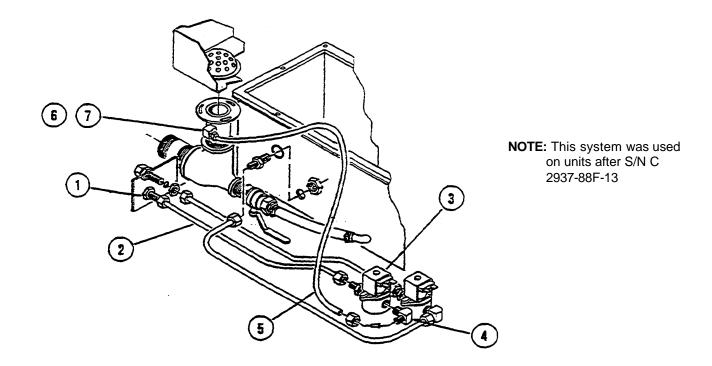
COLD WATER INLET TO STEAM GENERATOR
